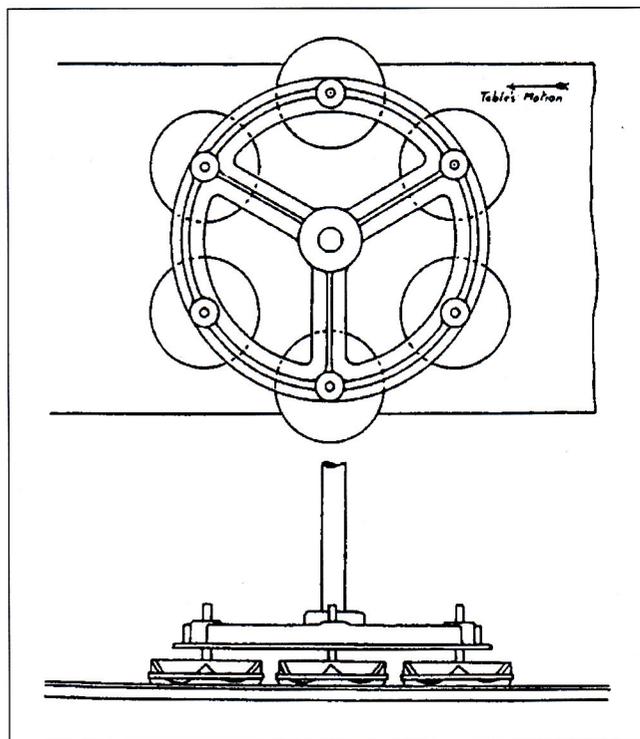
Plan and side views of a polishing machine, with six independently rotating heads, used to flatten and polish a sheet of glass (from ref. 19).
